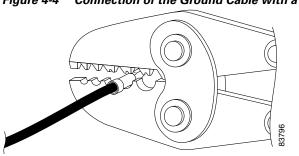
Connection of the Ground Cable with a Crimp Tool
